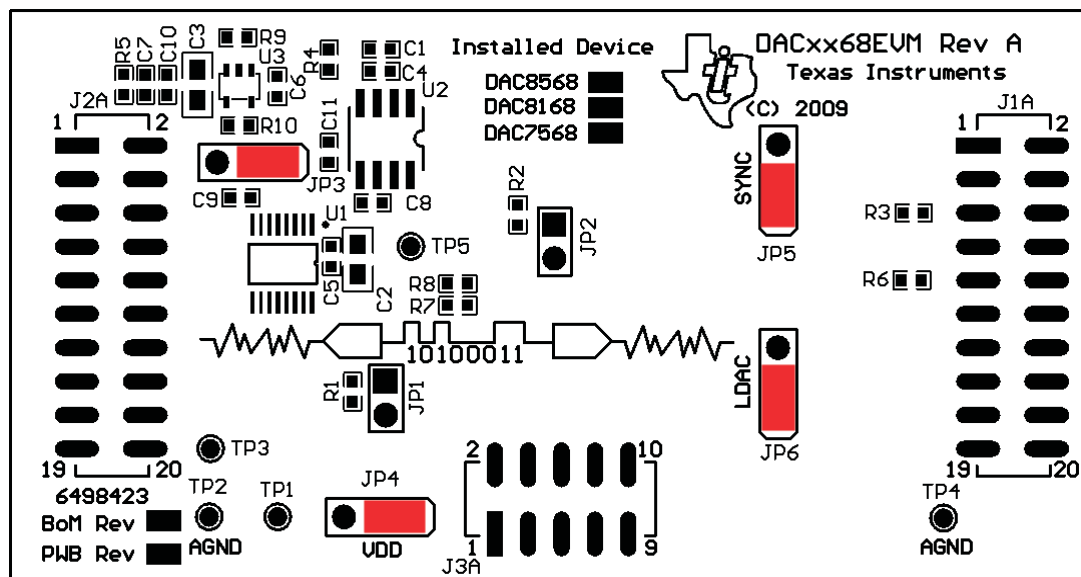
Top Layer Assembly Drawing and Jumper Locations
